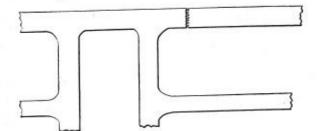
Bolt Hole Closed by Welding Before Cutting Out Frame for Welding
